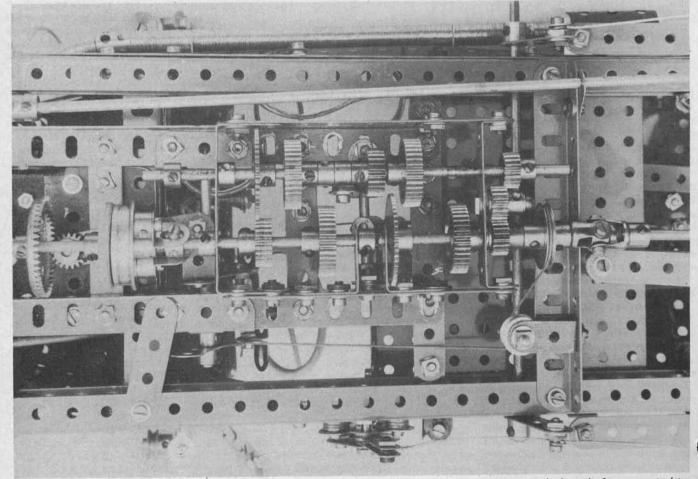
Close-up of simple clutch unit and "crash" gear-box. Note pulley and cord on transmission shaft connected to and acting as the footbrake.
